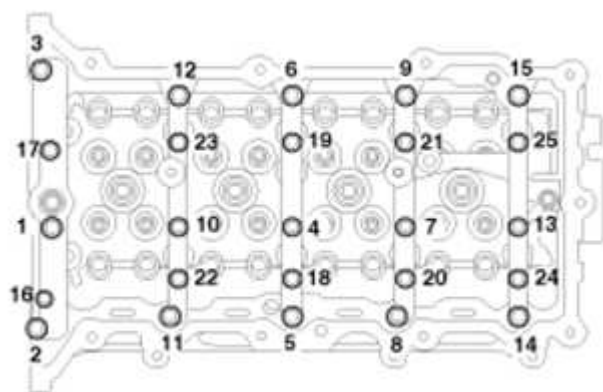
Camshaft Bearing Caps Bolts Tightening Sequence
